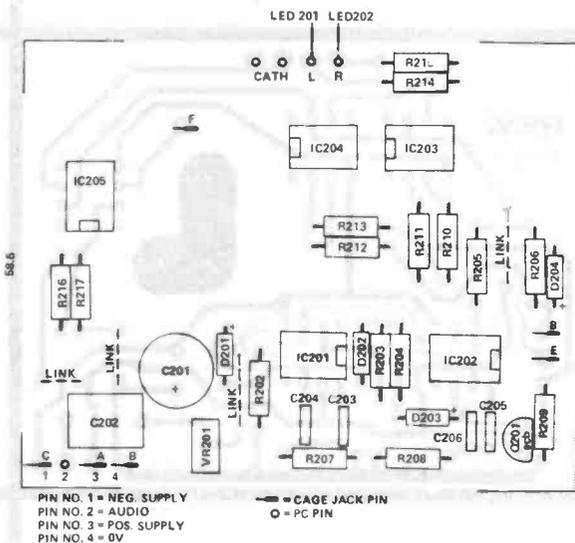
PCB overlay for the extra components required to construct the stereo version.
